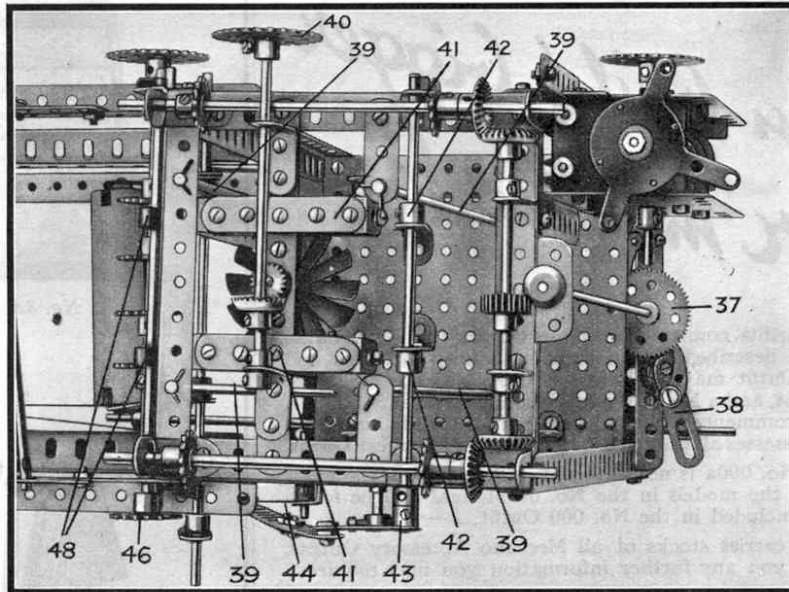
A plan view of the suction feed mechanism showing the method adopted for raising the pile of unprinted paper.
